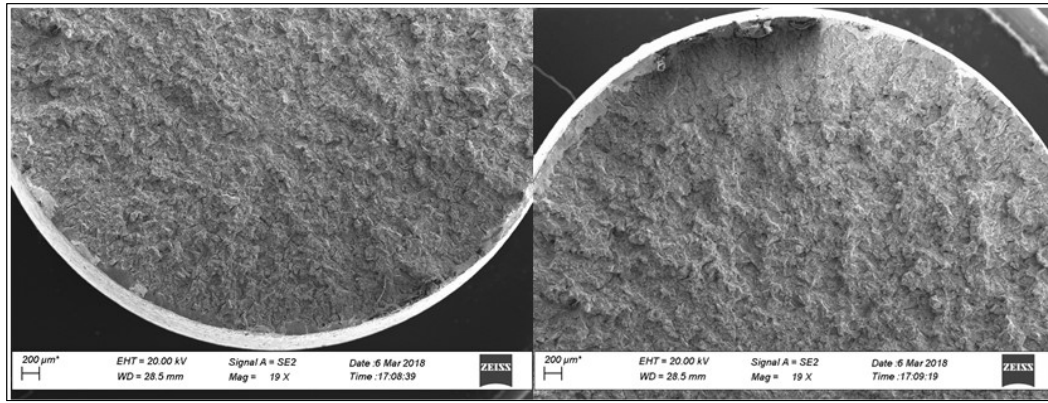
SEM micrograph showing general view of brittle fracture surface of tensile tested specimen. (SP-13)
